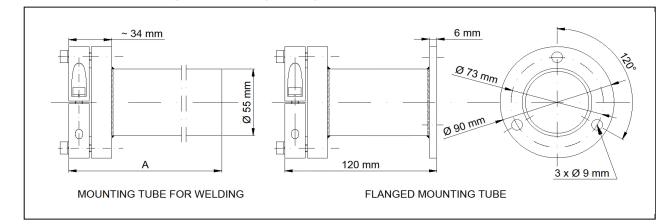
Pilot mounting tubes: for welding and flanged
